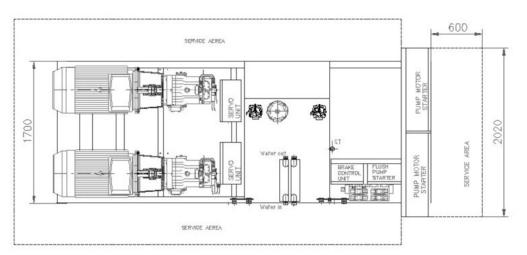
Example of a steering gear Hydraulic Power Unit (HPU)
